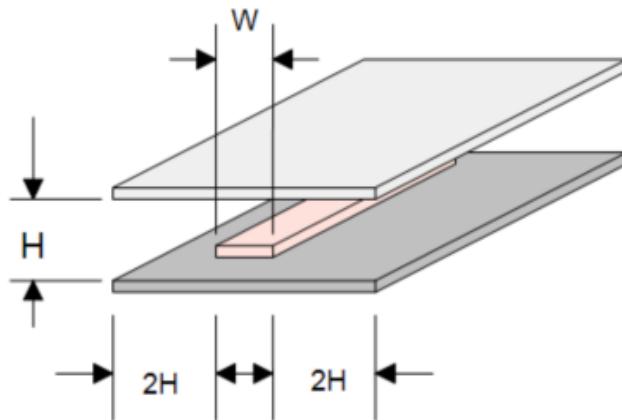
The Complete Structure of the Multilayer PCB Strip Line
